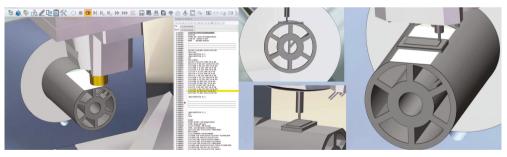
Milling and 3D printing simulation on the same machine tool (source: www.roboris.pl)
